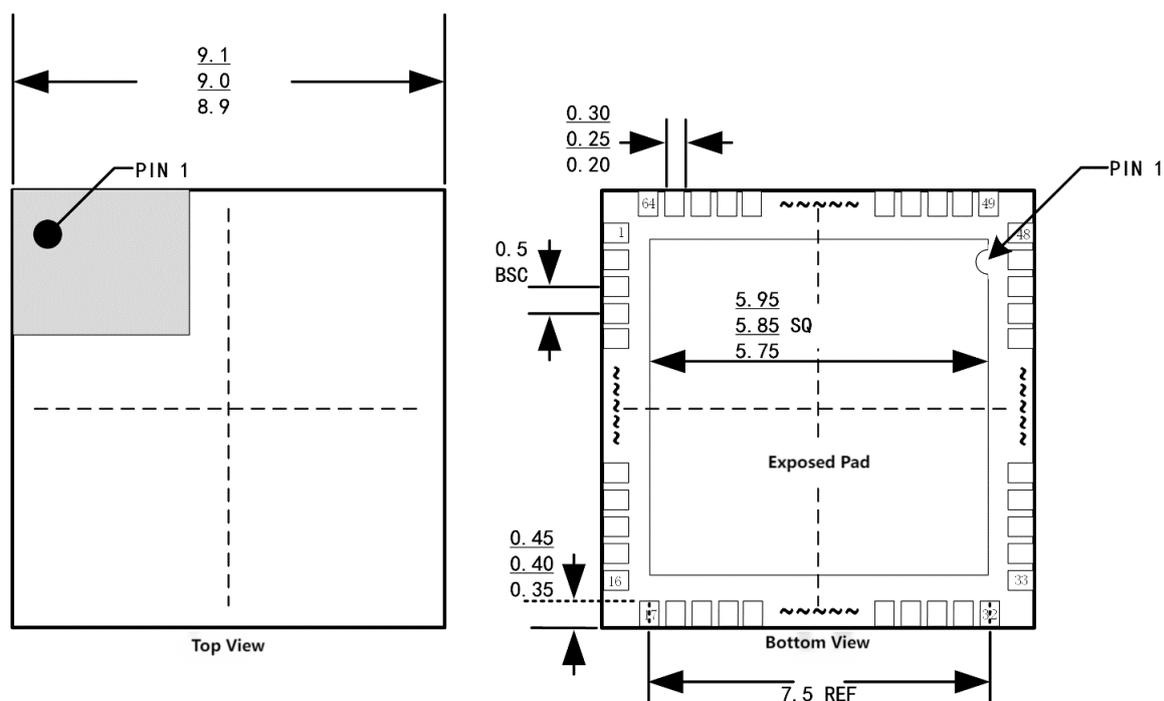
ADCP9268-80/105/125 Package Outline Dimensions.
